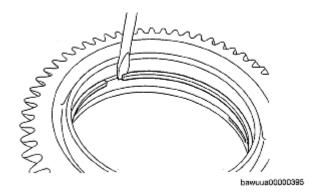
Installing Hole Snap Ring To Counter Drive Gear Courtesy of MAZDA MOTORS CORP.
